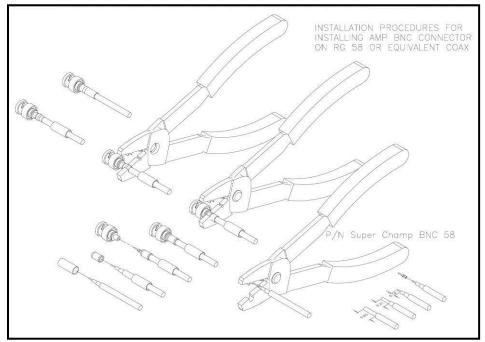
Cable Assembly Detail AMP 22395-1 50 OHM
